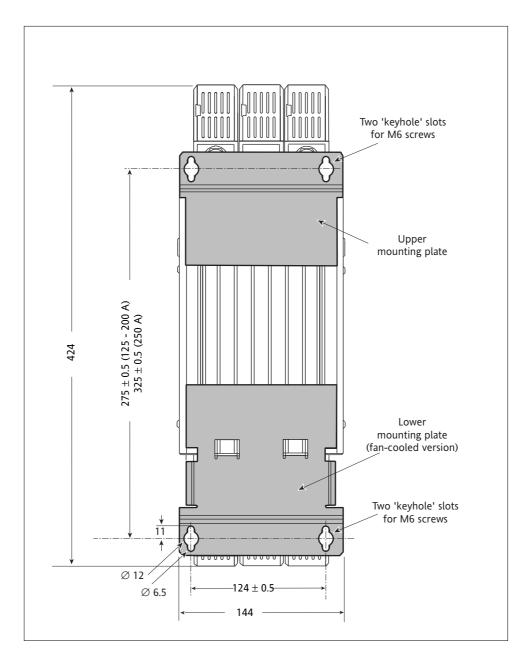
Bulkhead mounting for ratings 125 A to 250 A (fan-cooled unit, rear view).
